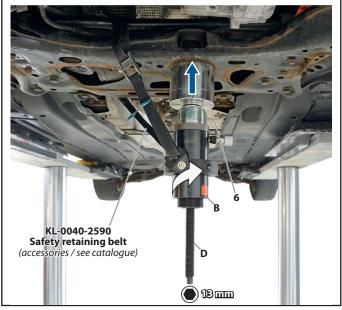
Turn in draw spindle "D" until the support sleeve "6" is applied, secure the double silent block tool.
